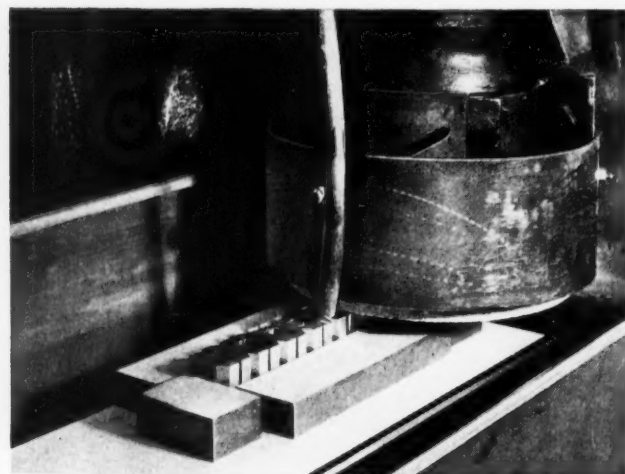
Parallel Blocks Facilitate Grinding the Ends of Pieces that are Much Longer than they are Wide
